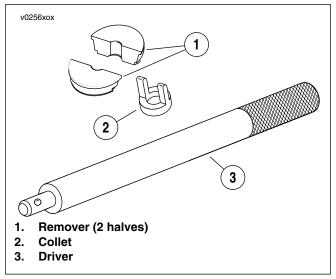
Race Remover Tools (HD-33416 and HD-39301-A)
